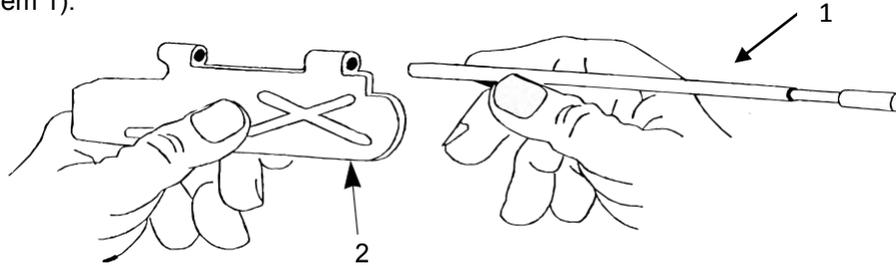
Ejection Port Cover Assembly and Grooved Headless Pin.
